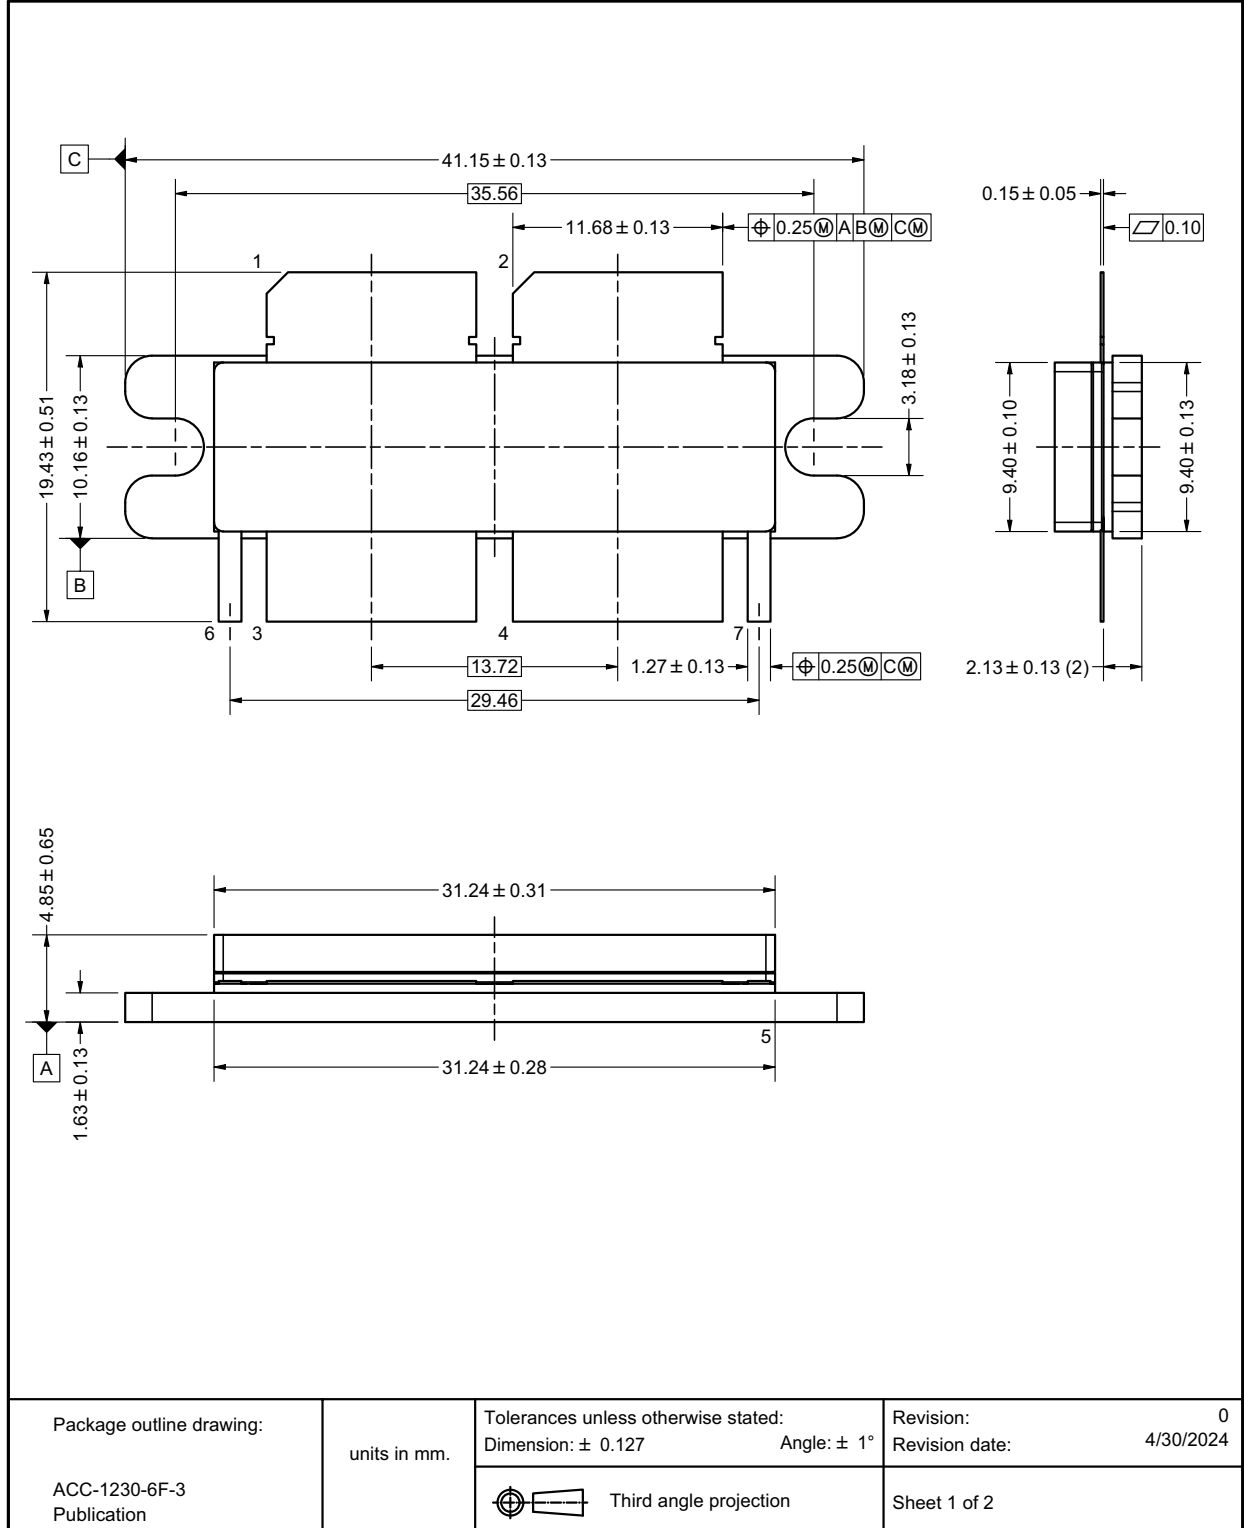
Package outline ACC-1230-6F-3 (sheet 1 of 2)
